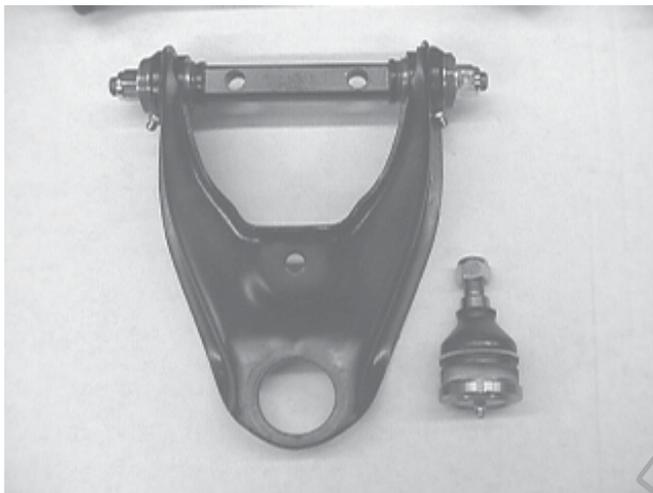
Here we have the Upper arm re-assembled except for the upper ball joint. Make sure that you maintain good alignment when re-installing the new ball joints. Rick's new ball joints are 0.015" larger in diameter than the OEM ball joints. That's because most of the replacements for the last 15 years were made to this oversize dimension. Better to have them tight to install than trying to hold them in a loose hole.
